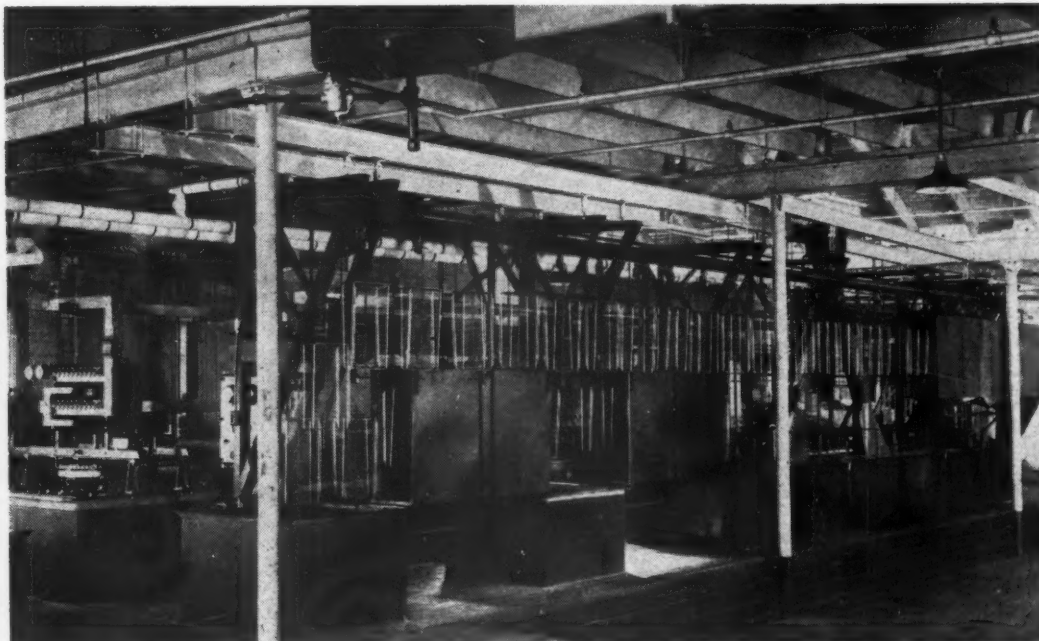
Overall view of a 30° angle type Lasalco full automatic conveyer.
